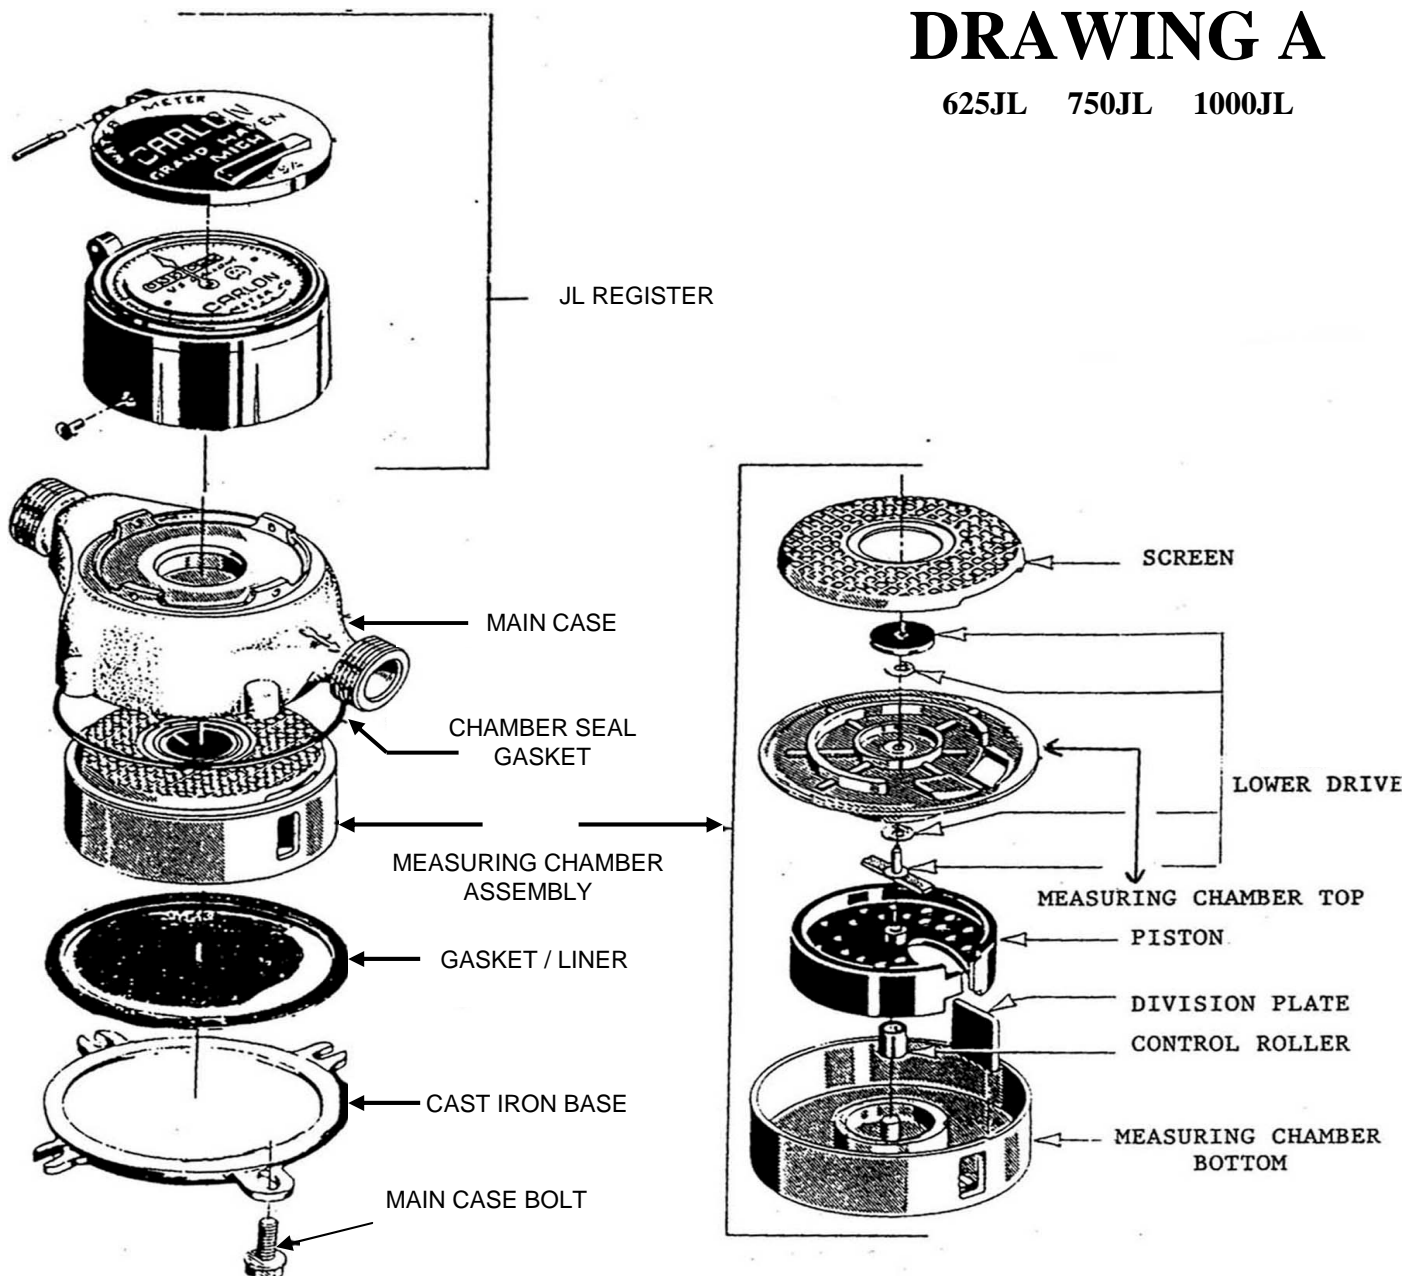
Drawing A shows the breakdown of parts for the 625JL, 750JL, and 1000JL series meters.
